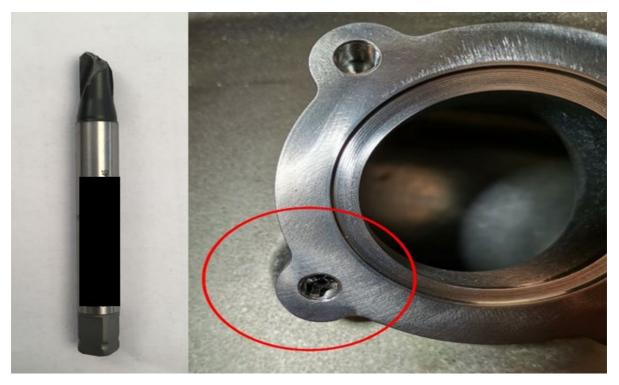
The thread tap broke during the final part of the threading process and stuck in the bottom of the hole.
